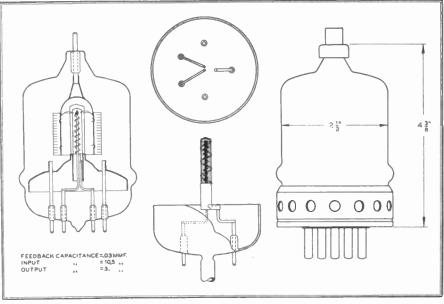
MECHANICAL DESIGN DETAILS OF THE TYPE 4-125A POWER TUBE
